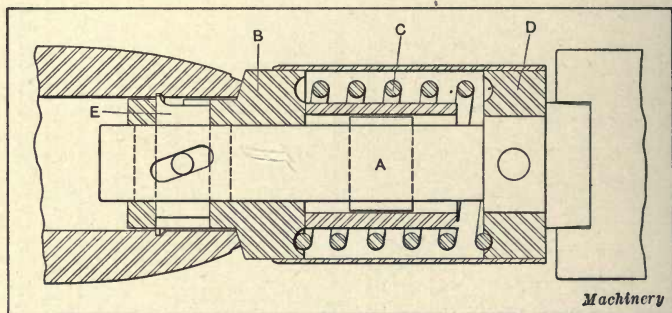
Special Recessing Tool used for performing Operation E shown in Fig. 112
